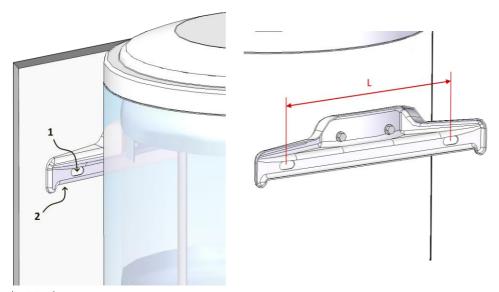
How to Fix on the wall the Boiler/Fissaggio a muro del bollitore
